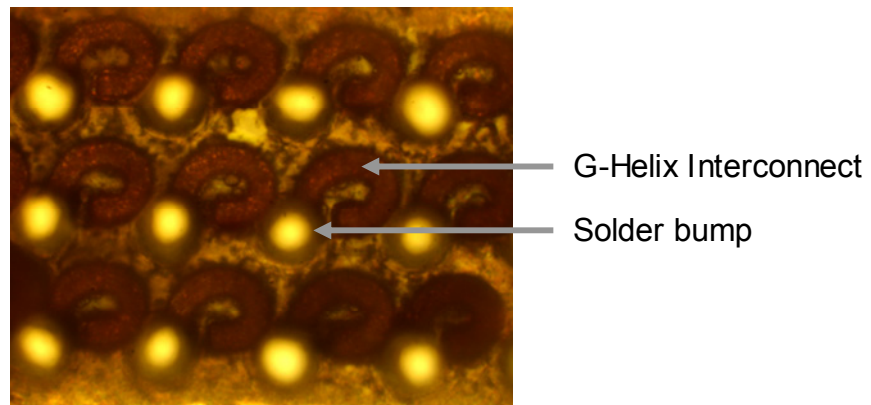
Backside of G-Helix Assembly on a Glass Substrate
